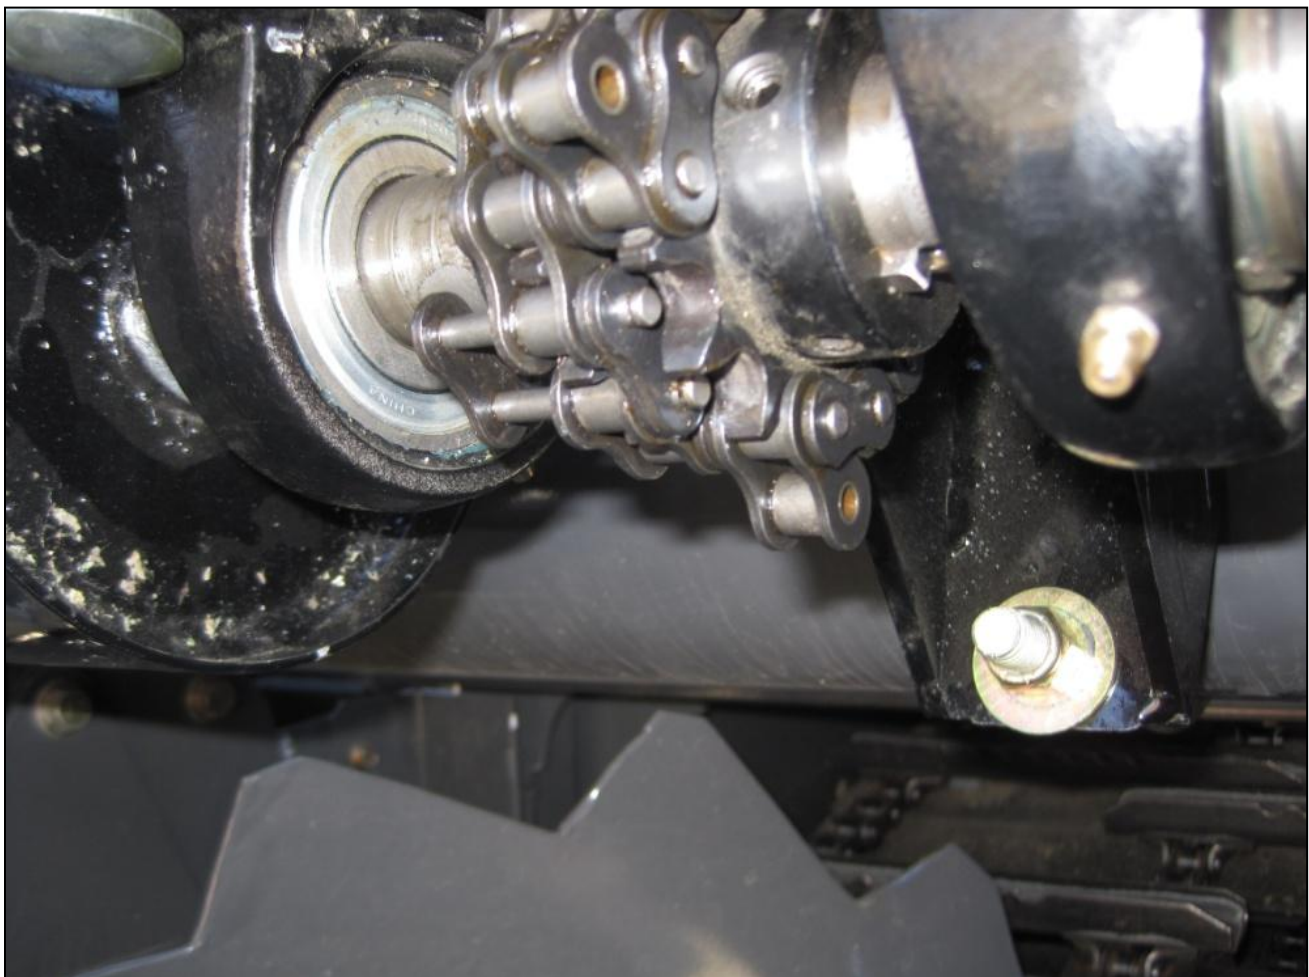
Install the joiner link into chain coupler with one side bent out of way .
